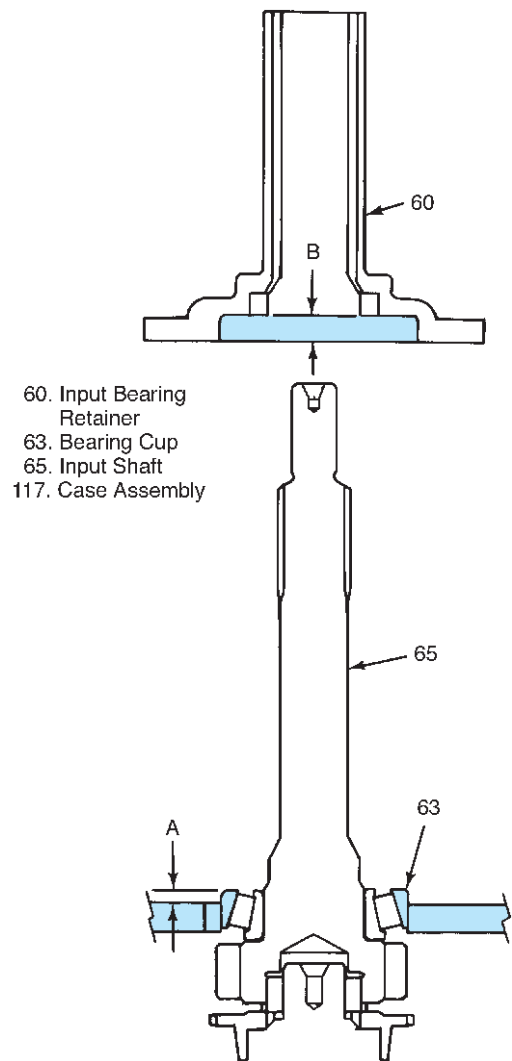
A second method of adjusting input/output shaft bearing preload on a T5 transmission is to push the input bearing cup into the case and measure distance A, measure distance B in the bearing retainer, and subtract A from B. The shim should be this size + 0.003 in. (Courtesy of BWD Automotive Corporation)
